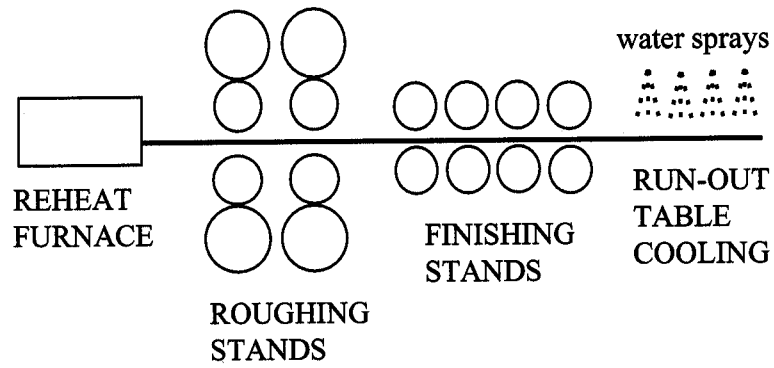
Schematic layout of a hot-rolling mill, showing the reheating furnace, rolling stands and run-out table. The roughing stands impart large initial reductions in thickness.
